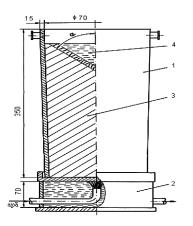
Ansamble mould – tube cooler: 1 - mould; 2 - cooler; 3 - solidification alloy; 4 - liquid alloy; $\alpha = \text{angle}$ of solidification front.
